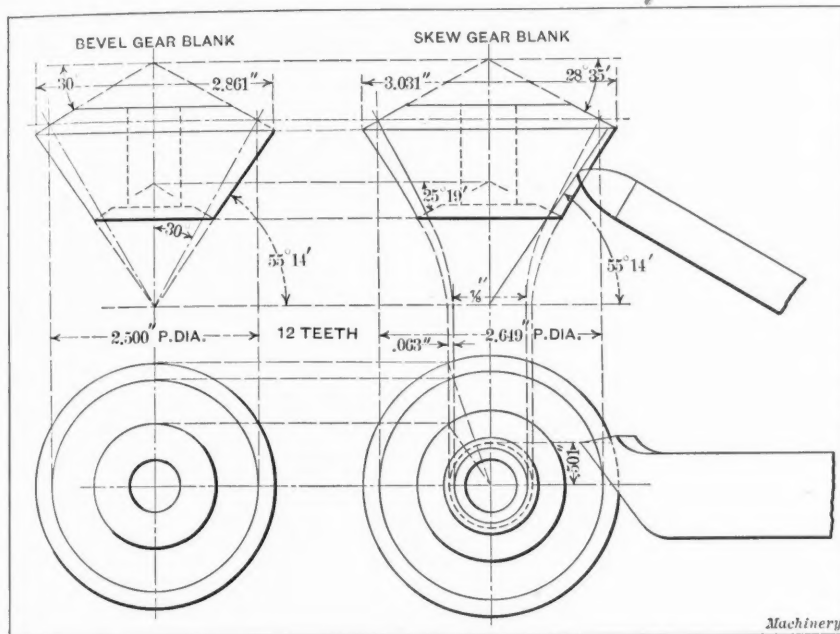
Turning the Blanks for Skew Bevel Gears and Regular Bevel Gears
